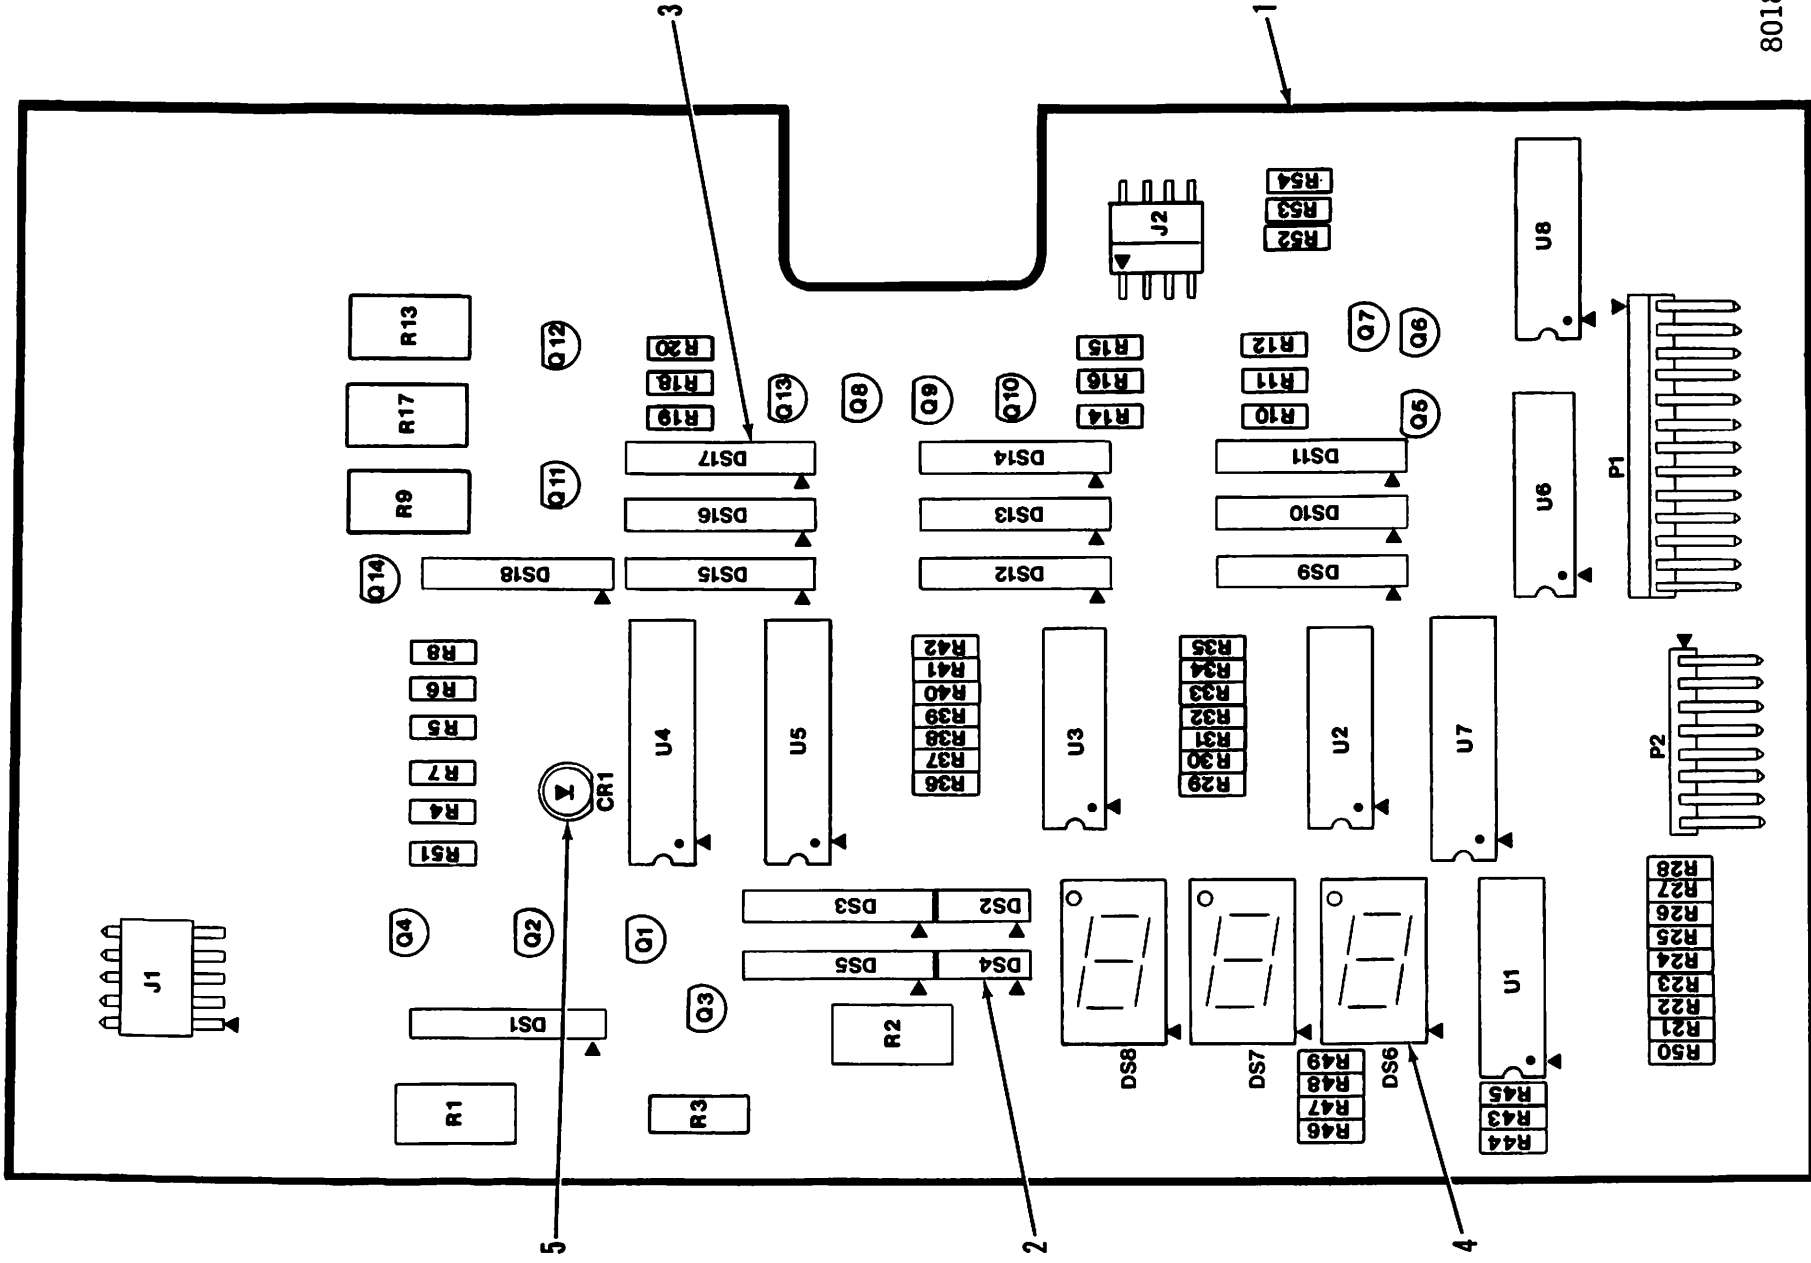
ATTENUATOR, PULSE DEFIB PCB ASSEMBLY
